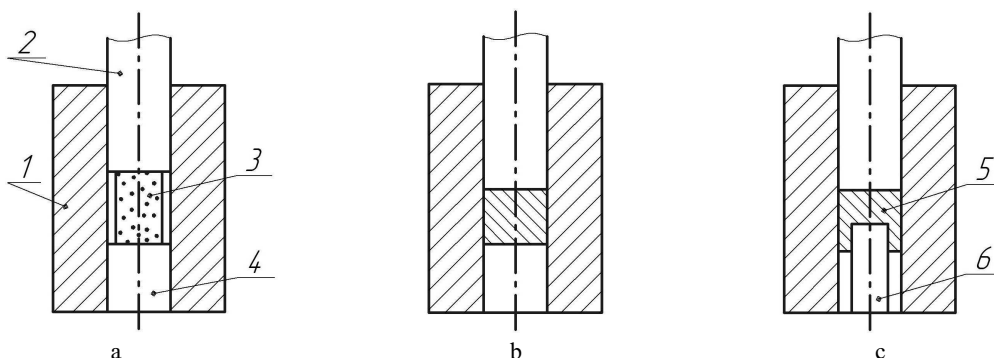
The extrusion scheme without backpressure: loading of the billet (a), upsetting on the limit stop (b), extrusion (c)
